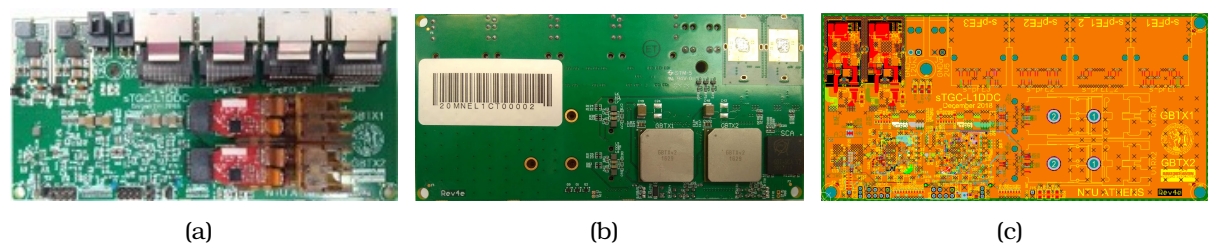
sTGC-L1DDC pre-production board, (a) top side, (b) bottom side and (c) layout.
